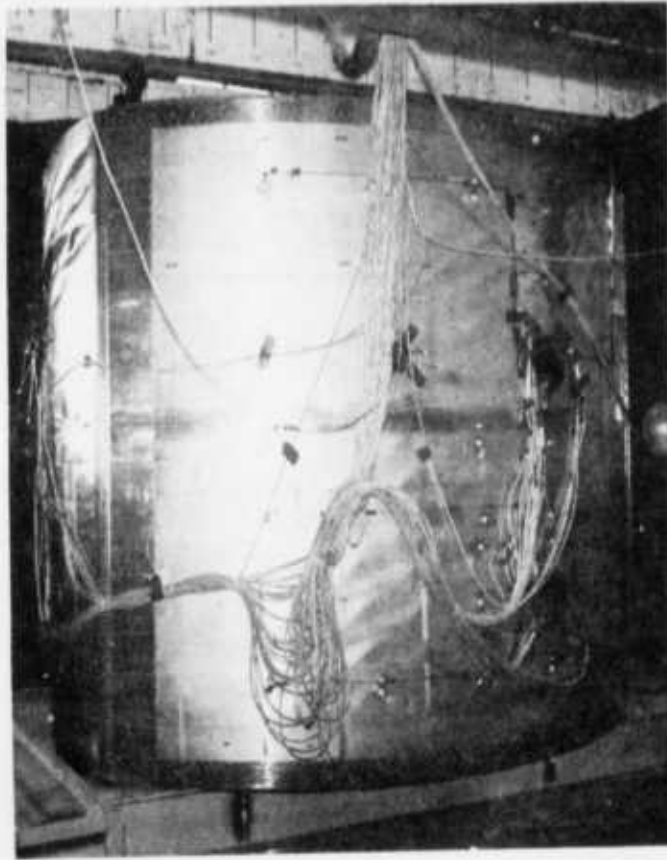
WELDBONDED TEST PANEL AFTER STATIC TEST
